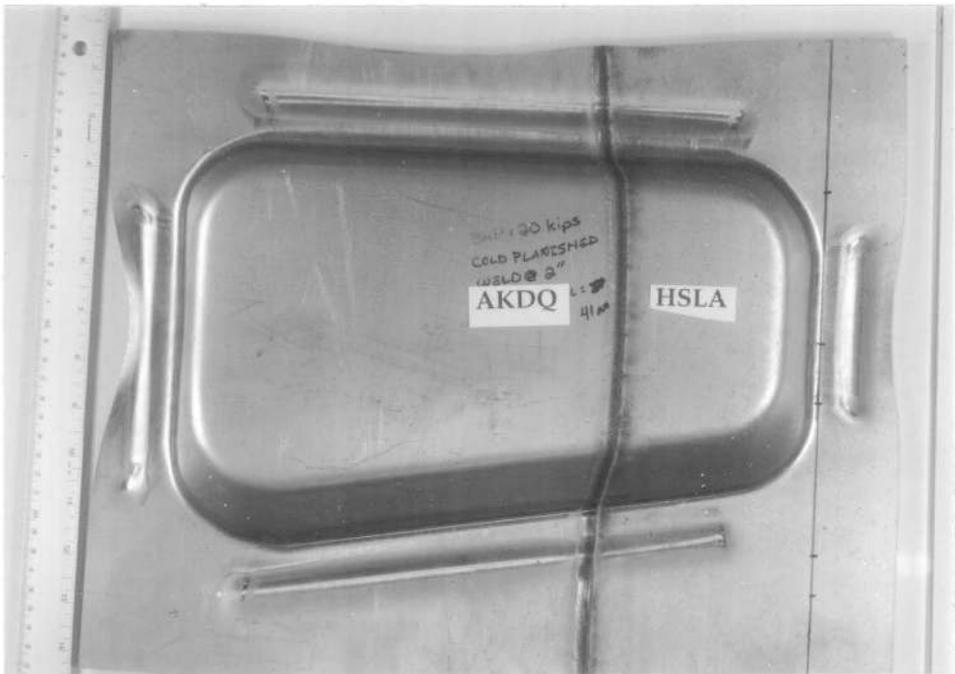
A photograph of the deformed blank for a cold planished HSLA/AKDQ tailor-welded blank on the scale fender geometry.
